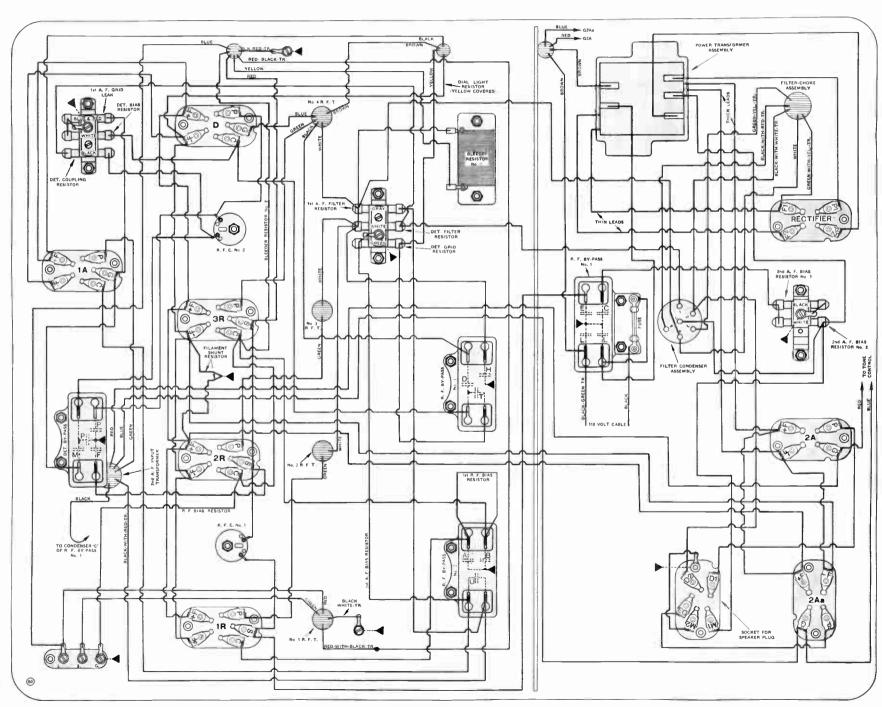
BOTTOM WIRING OF TYPE P CHASSIS.
